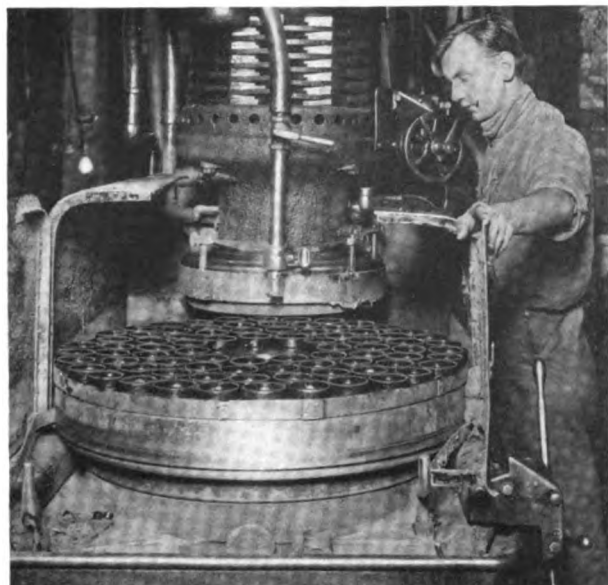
Ball-Bearing Rings, on No. 16 Grinder
